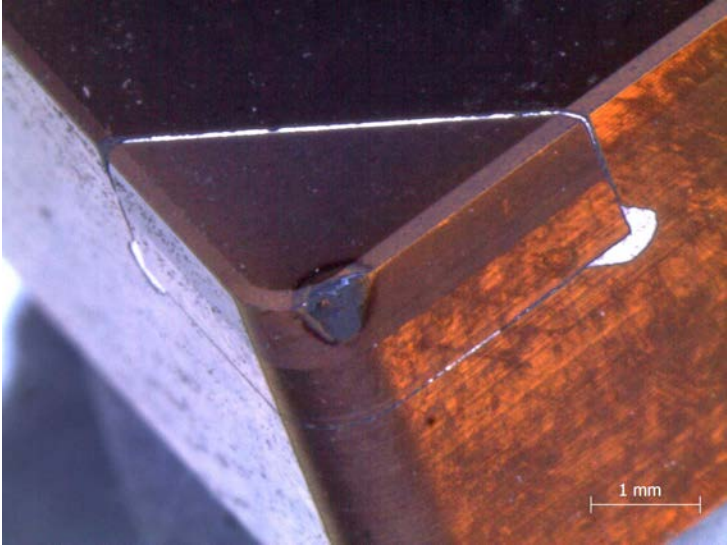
LOM image of an used TiSiN coated cutting tool.
